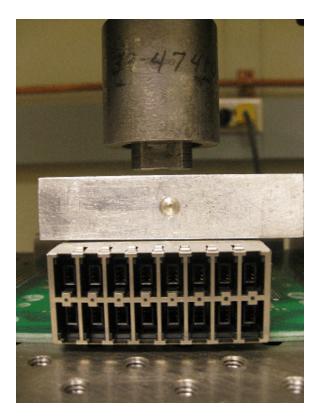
Vibration & Mechanical Shock Mounting Fixtures
